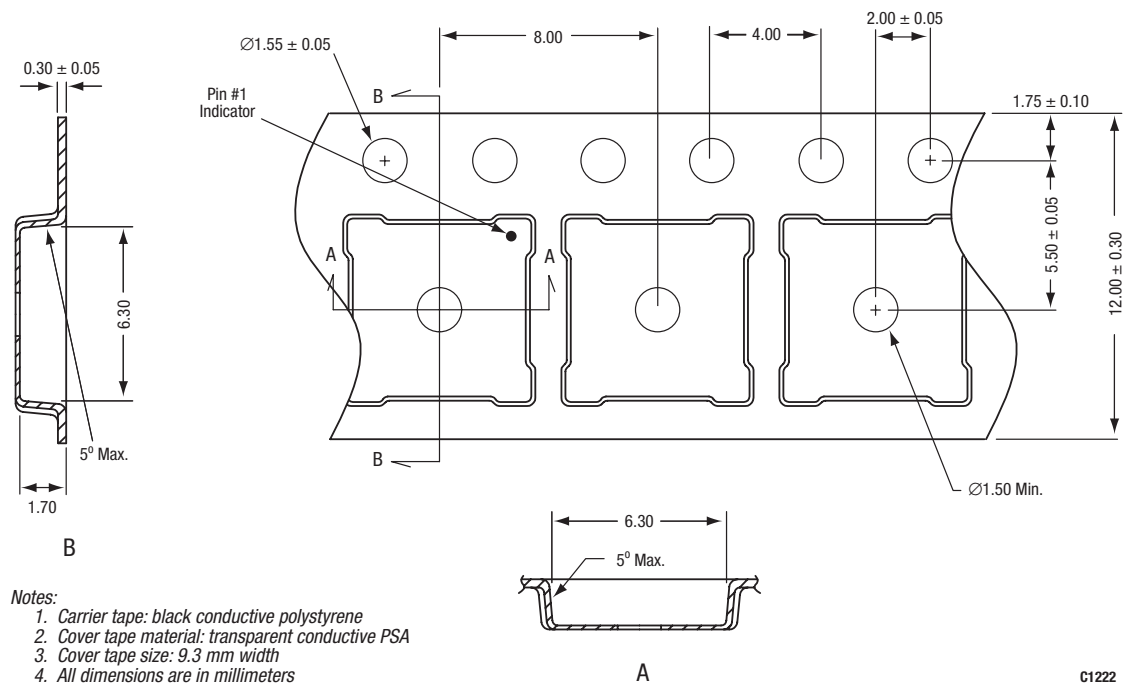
SKY65135 20-Pin MCM Tape and Reel Dimensions
